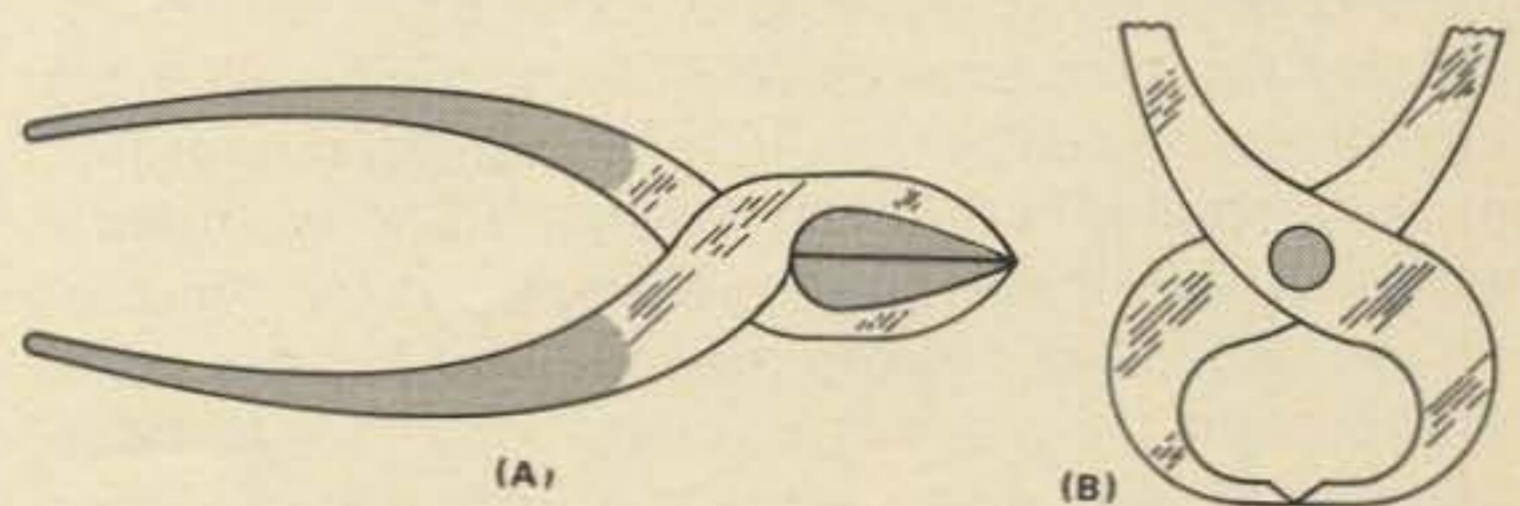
A—Diagonal cutters. B) Side view of nippers used to cut flush with printed circuit board surfaces.
